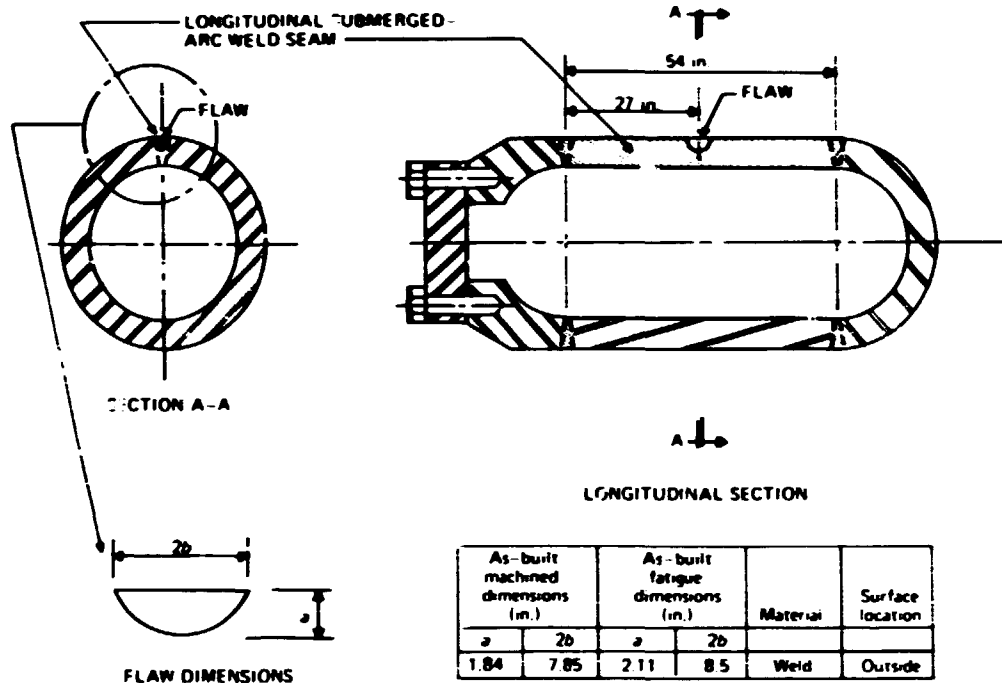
Sketch showing flaw locations and as-built flaw size for intermediate test vessel V-3.
